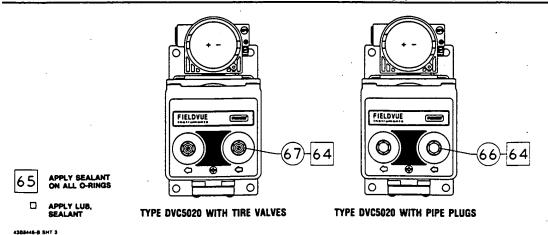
Type DVC5020 Series Digital Valve Controller Assembly (Continued)
